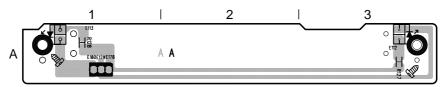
EU56 Front (LED) PC Broad (Bottom side)
